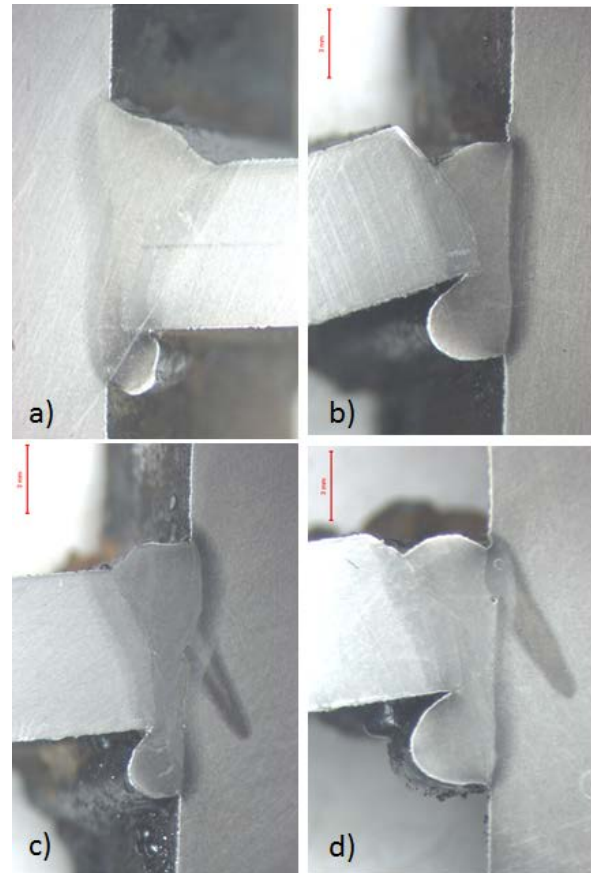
Cross section from a butt joint from a welded demonstrator beamer. Largely defect free, but small amounts of pores was often present
